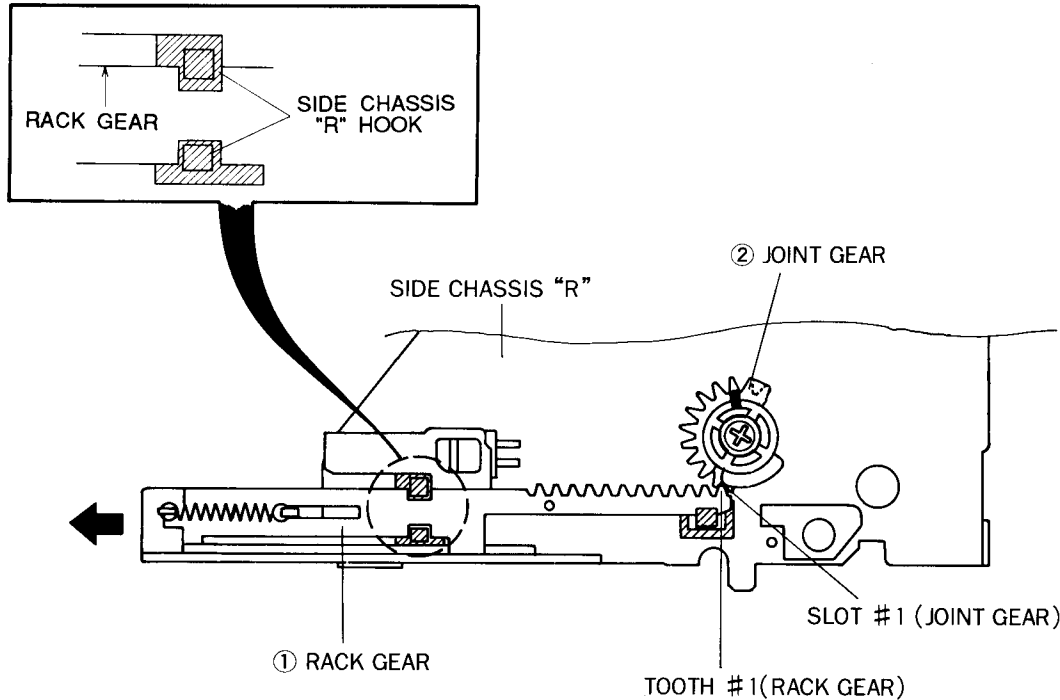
Reinstallation and Timing of Rack Gear and Joint Gear
